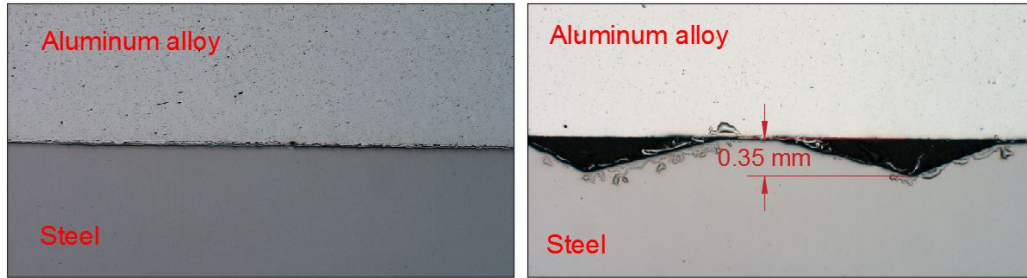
The cross section of the joints before welding, the left is conventional lap joint without grooves, the right is innovative lap joint with grooves.
